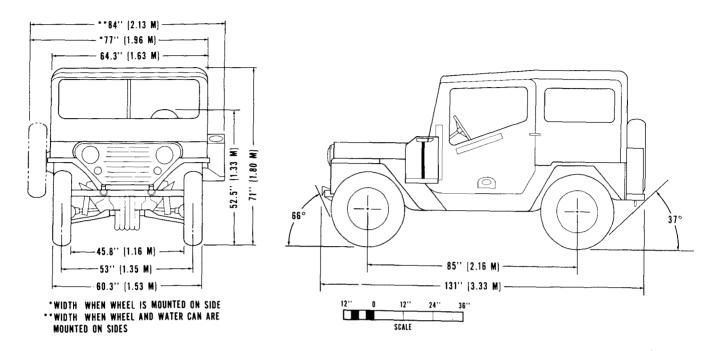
Side and end elevations of truck, \(\frac{1}{4}\)-ton, guided missile equipment or carrier, TOW.
